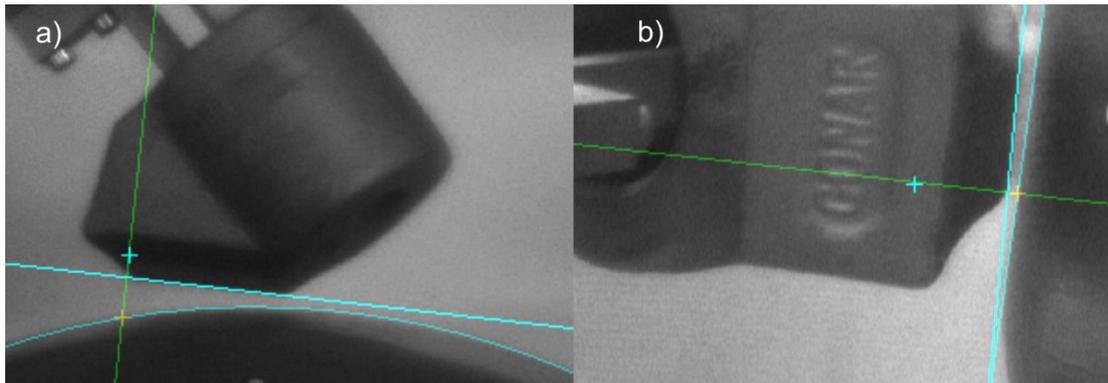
The way of finding the pick holder and the side surface of the cutting head in the photo taken from: a) position B; b) position C.
